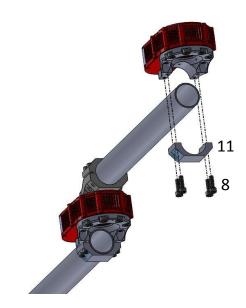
Attaching the Third Hebi Actuator to the Assembly shown in Figure 8
